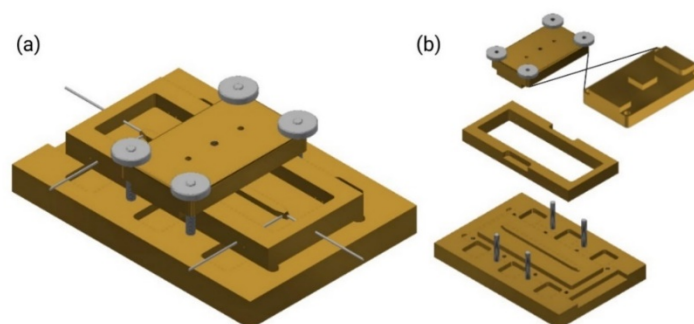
Casting mold for producing microfluidic reactors made of PDMS for the BESs. An assembled casting chamber with four inserted placeholder cannulas is shown in (a). (b) indicates the individual parts of the casting chamber. The mold is composed of a base with a negative straight channel, a frame with holes to insert cannulas. Additionally, a brass component is attached to create a 1 cm² recess in the silicone body for insertion of the electrode.
